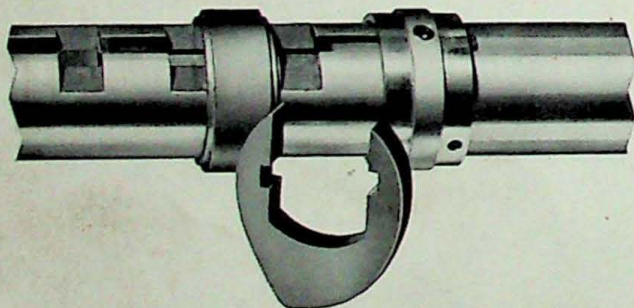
Sectional view shows the sliding cam-carrier on shaft with cam removed.
